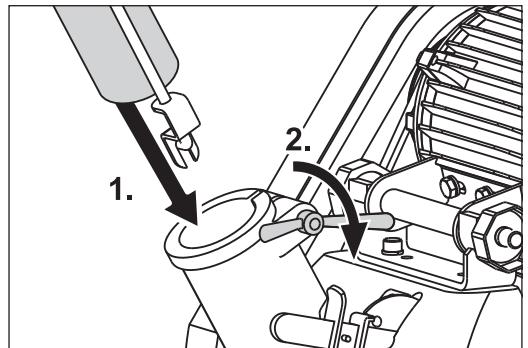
Insert the guide tube into the opening in the machine housing (1.). Tighten the wing nut (2.).
